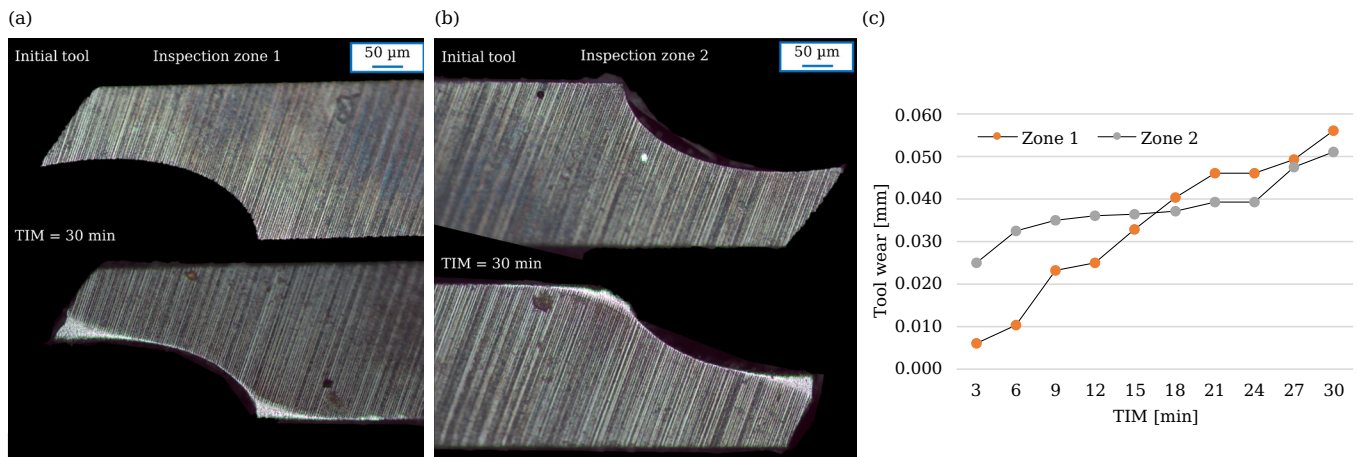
Wear Inspection Zones 1 (a) and 2 (b) for the initial tool (top) and after 30 min of milling (bottom), and wear evolution for these zones (c).
